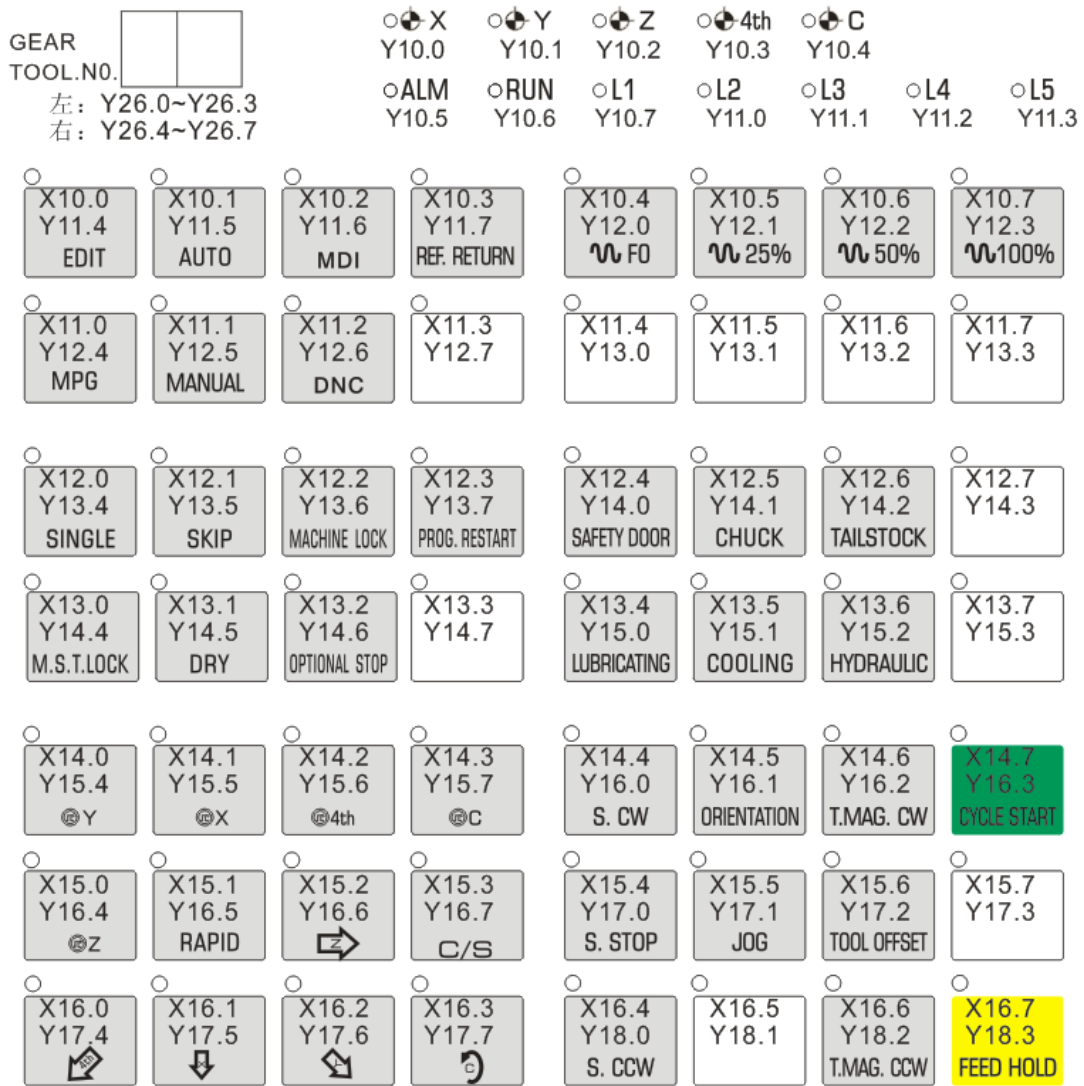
GSK988TA-H Standard layout of operation panel
